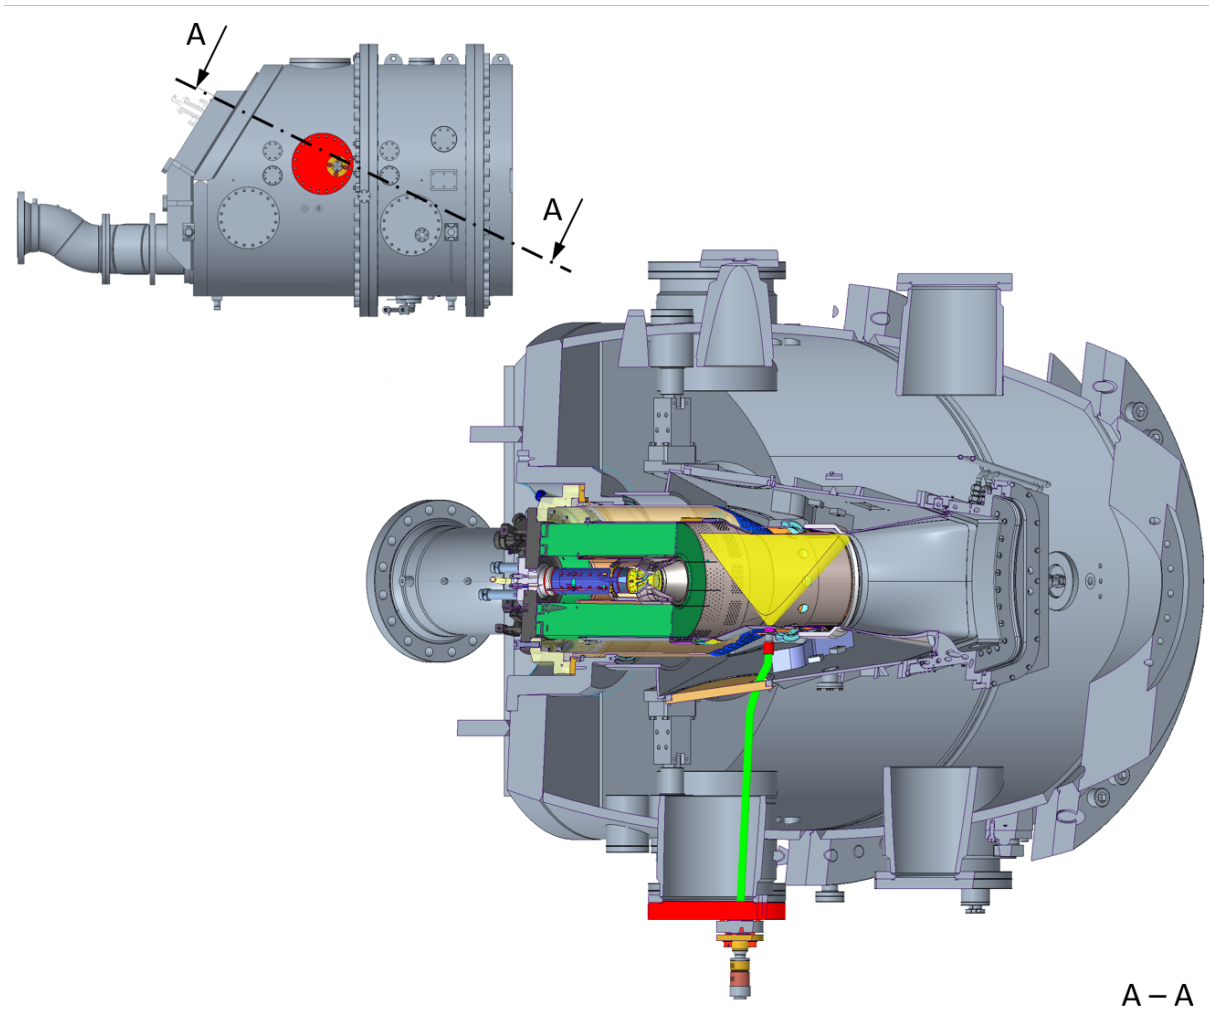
Side view and cross section of the HBK-4 rig with probe assembled. The resulting viewing angle is indicated in yellow. The probe is fed through the manhole cover (red) and the flow box lid (gold).
